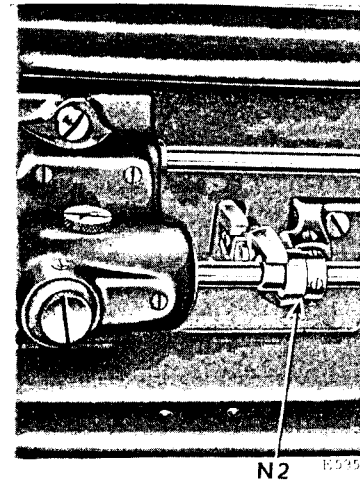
View of Machine 110w128 Showing Adjustment for Timing the Knife
